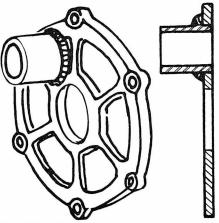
View of rotary valve cover showing method of installing tube for larger carburetor. Outside diameter of tube must fit carburetor and inside diameter of tube should match carburetor bore.
